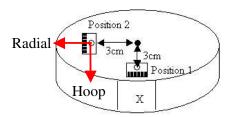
Schematic of the dry machined disc showing the XRD measurement directions and hole drilling locations.
